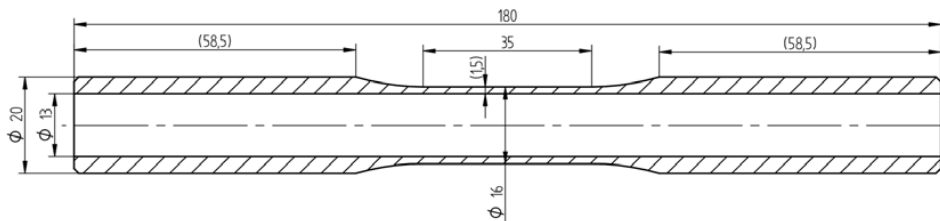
Tubular specimen geometry and dimensions (in mm).
